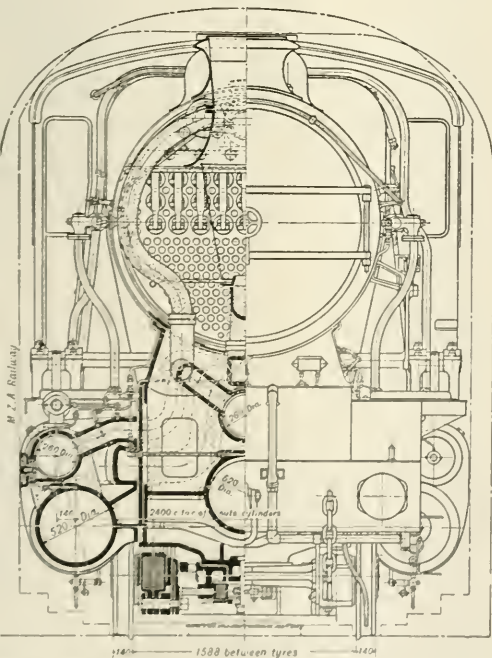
SECTION AT CYLINDERS AND HALF-FRONT VIEW
